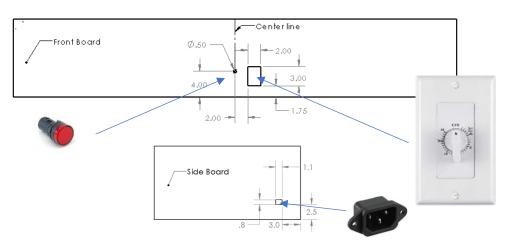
Front Board. The circular hole is for pilot lamp and rectangle hole is for timer switch. Adjust the hole sizes for parts at hand.
